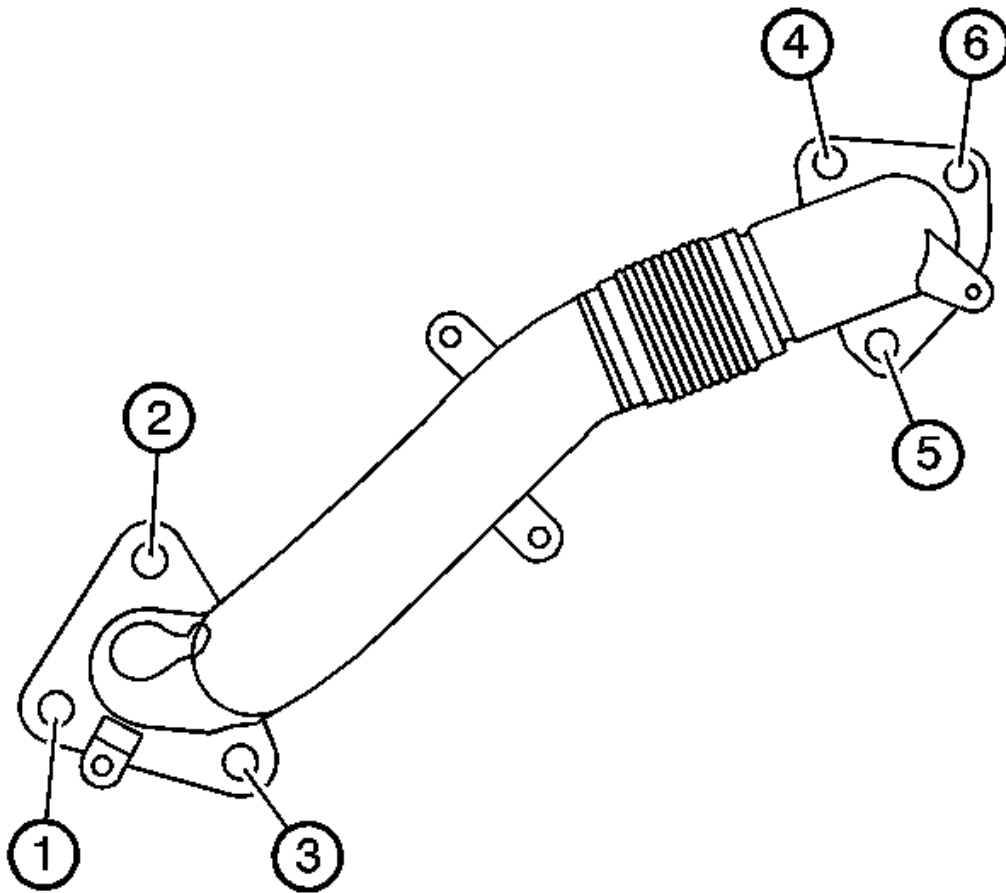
Exhaust Pipe To Exhaust Manifold Bolt Tightening Sequence - Left Side
